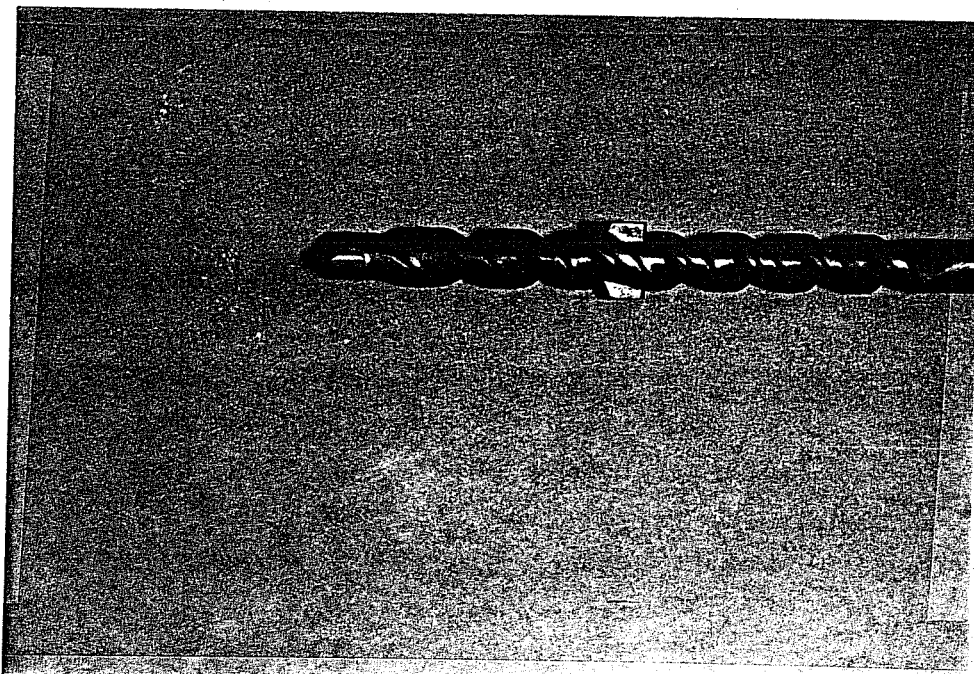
Modified Drill Bit to Produce Stepped Bore Hole
